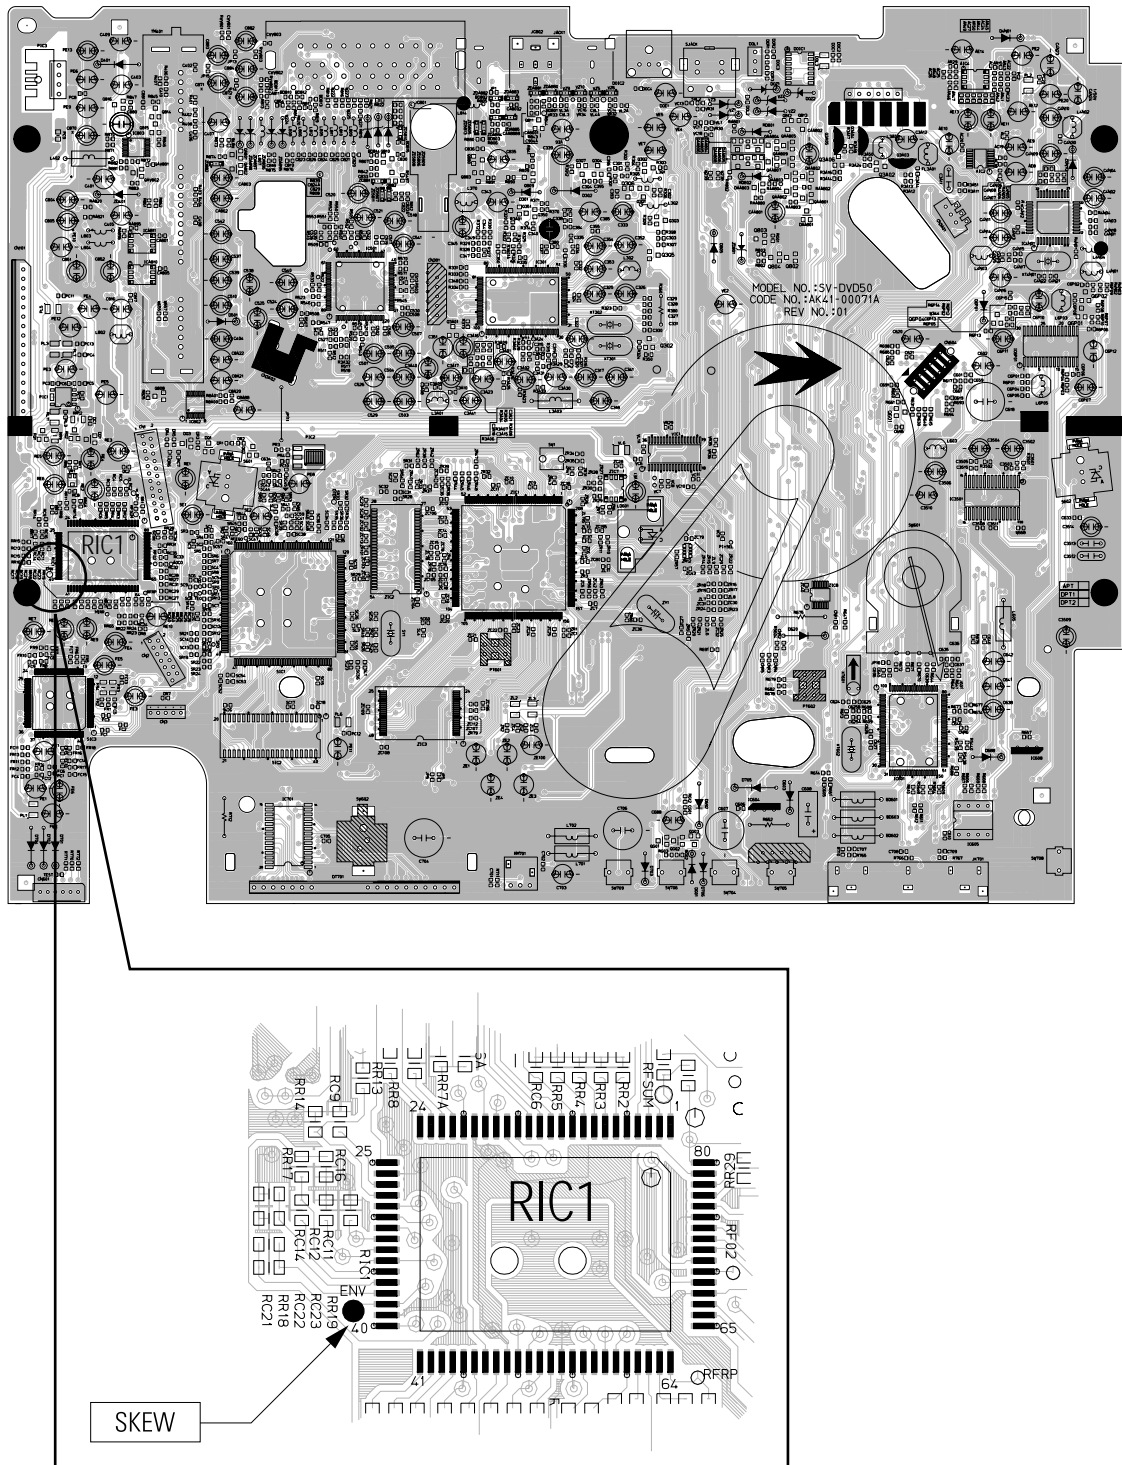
Location of test Point (Main PCB - Top Side)
